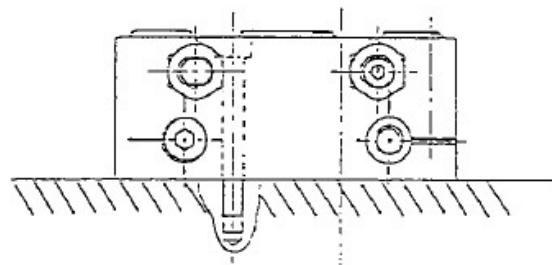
Fixing from upper (by hexagon socket head cap screw)
